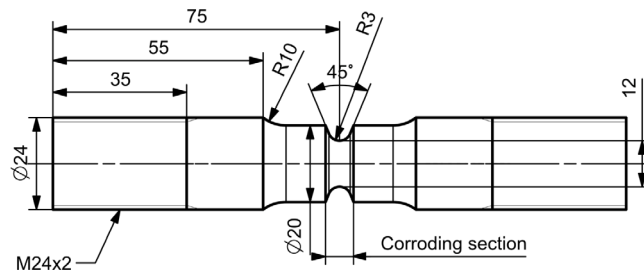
As-machined specimen geometry for TP1. All dimensions are given in millimeters.
